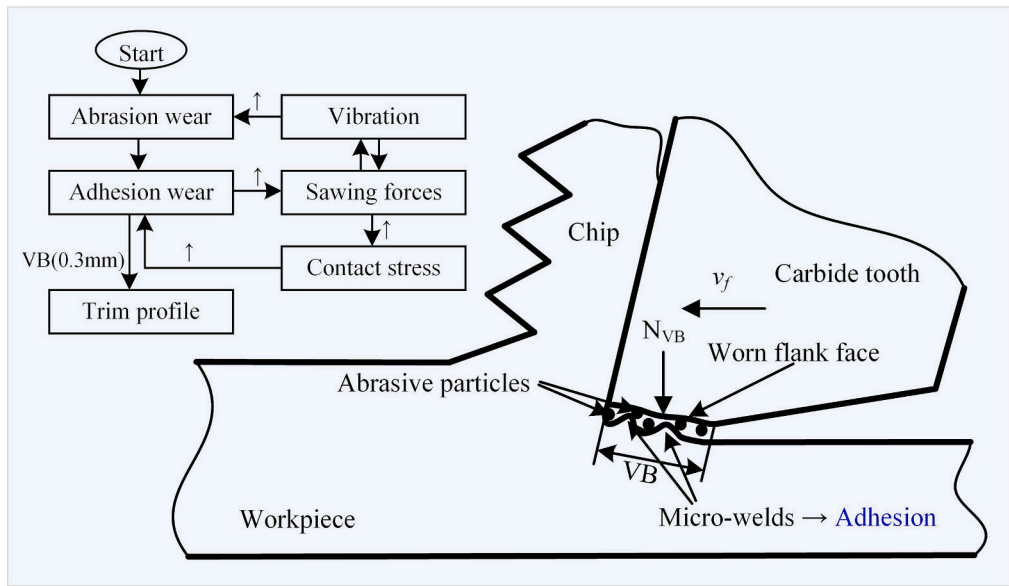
Schematic diagram of the tooth-workpiece interface.
